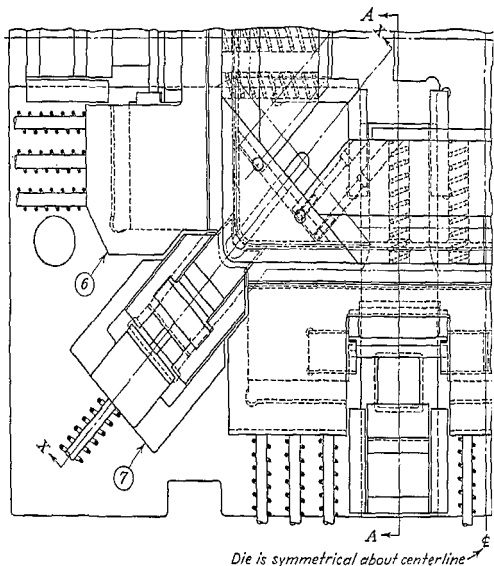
Quarter-plan view of die for flanging a freezer-lid panel.¹⁶
